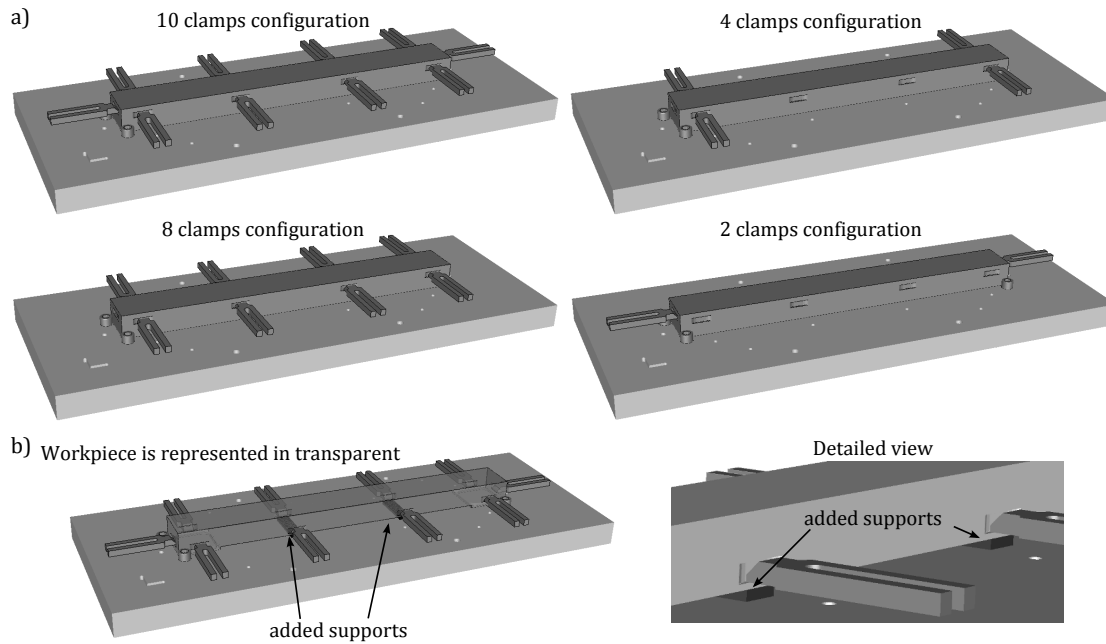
Fixture: a) The four different fixture layouts in function of the number of clamps used ; b) Supports are added for the eight and ten clamps configuration for the second machining step
